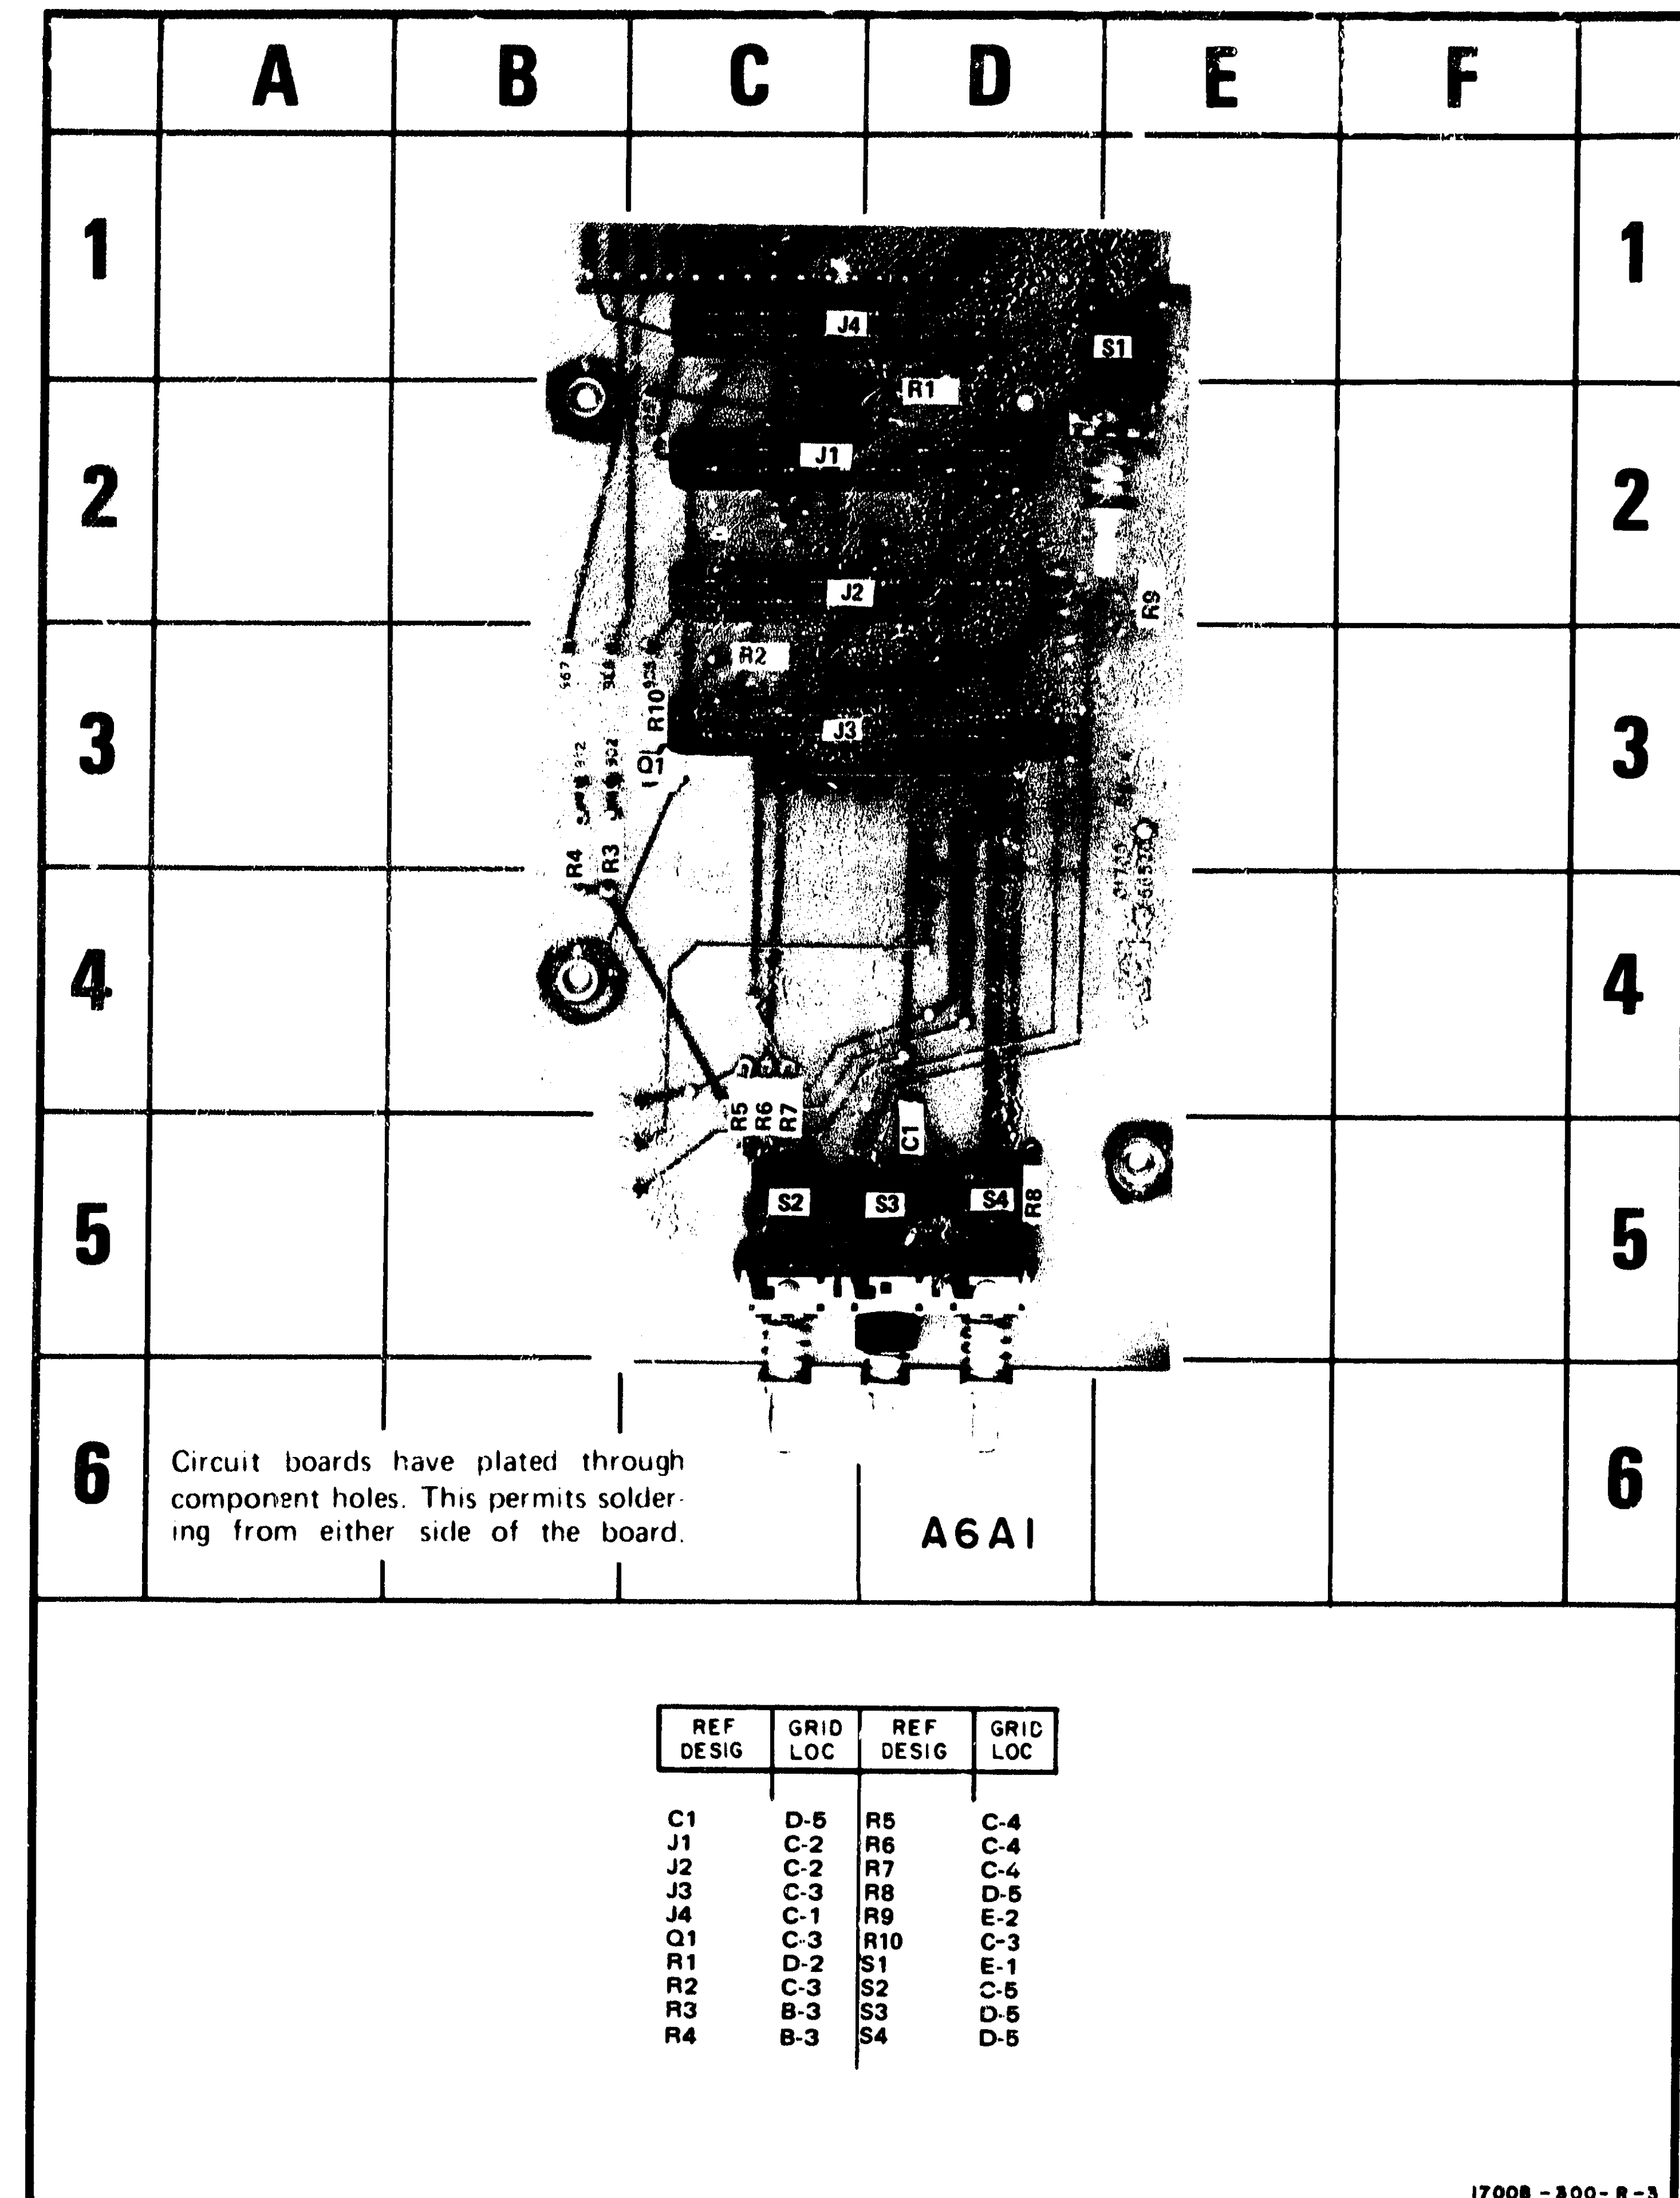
Horizontal Mother Board, A6A1, Component Identification
